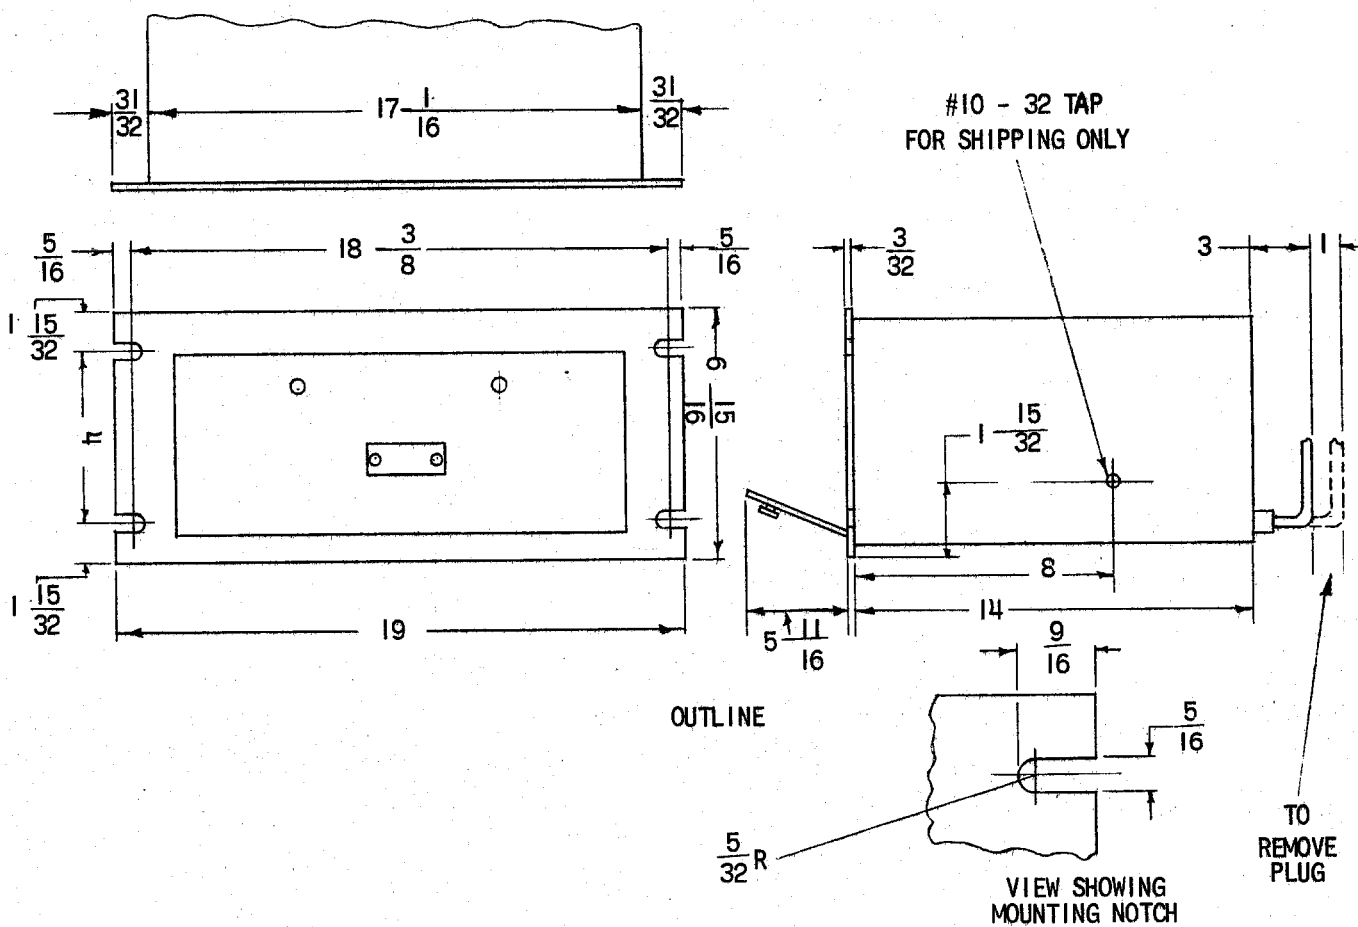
(0227A2037-0) Outline And Mounting Dimensions For The SLAT51D Relay
